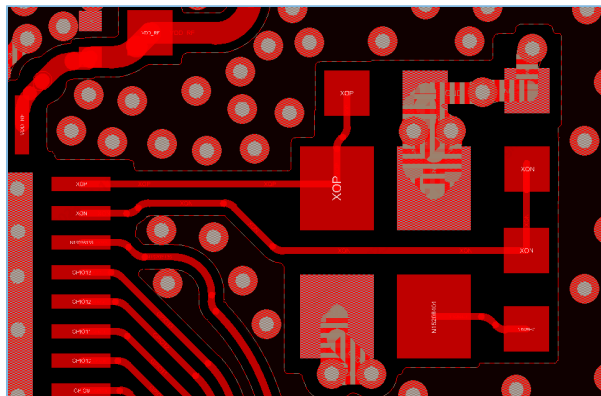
Reference clock layout for 4-layer PCB in QFN48
